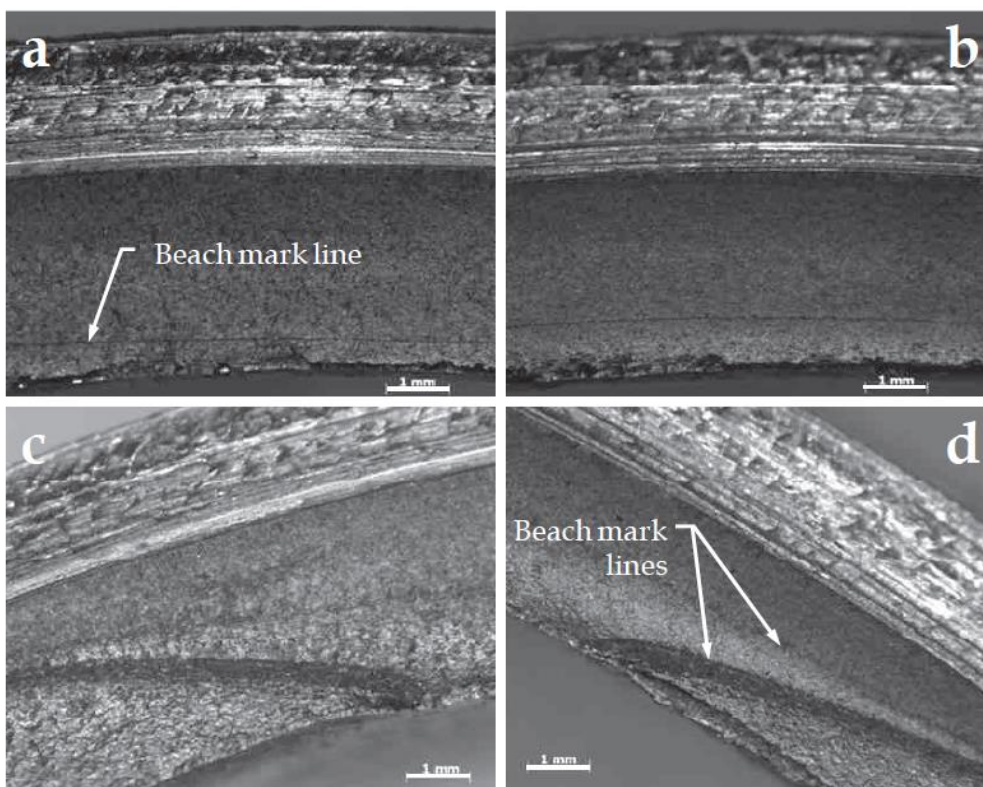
Detailed view of the fracture surface with beach mark line.
